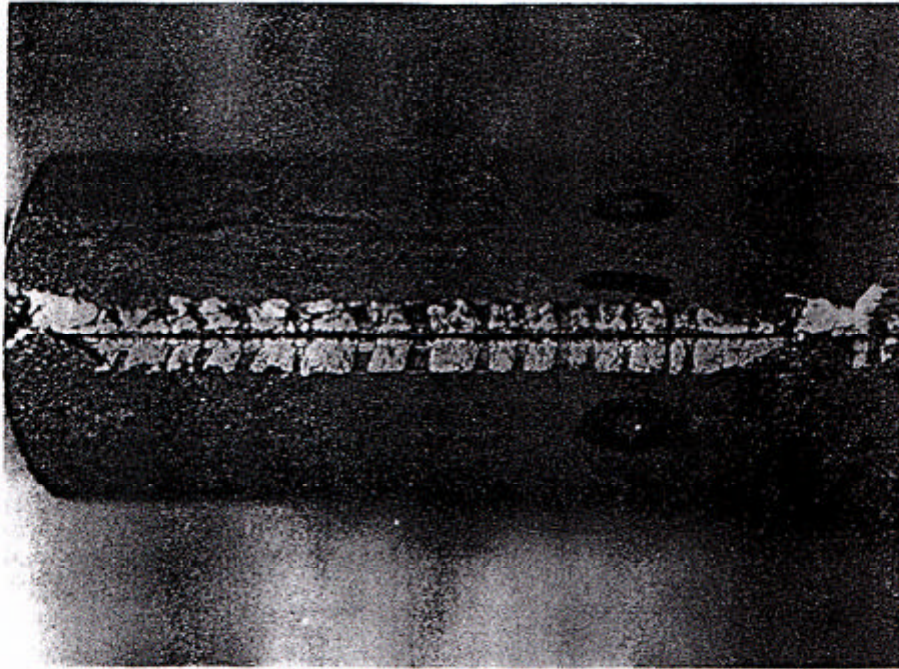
RESISTANCE WELDED - 4.55 MM
